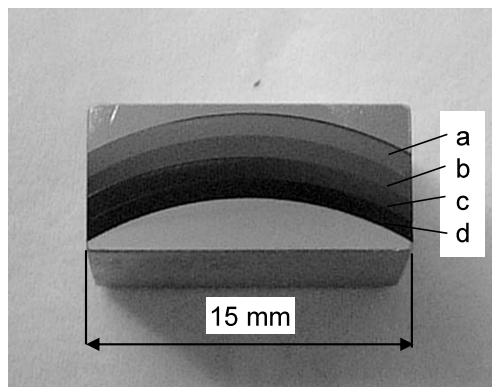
Photograph of the machined fly-eye mirror with four mirror elements
